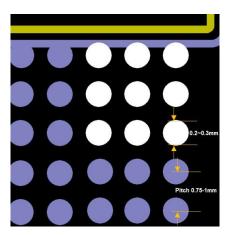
PCB Exposed Pad Land Pattern Via Grid
